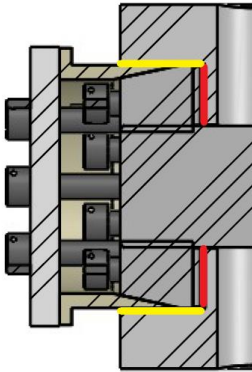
Highlighted mating surfaces between bondura® pin system and flanges
